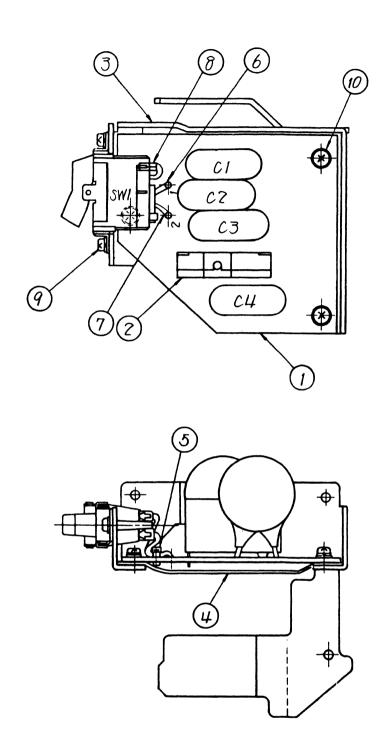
LEPW-1 Circuit Board Assembly (3LX-86727-1) (for 115 V)
